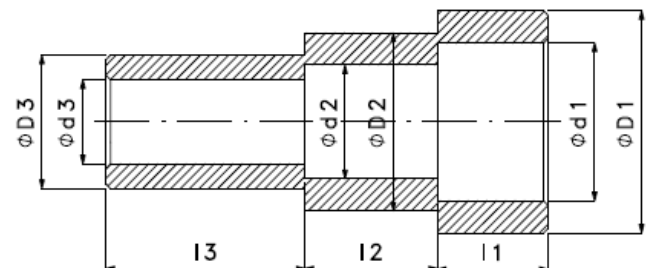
Geometric dimensions of the three-stepped simplified shaft
